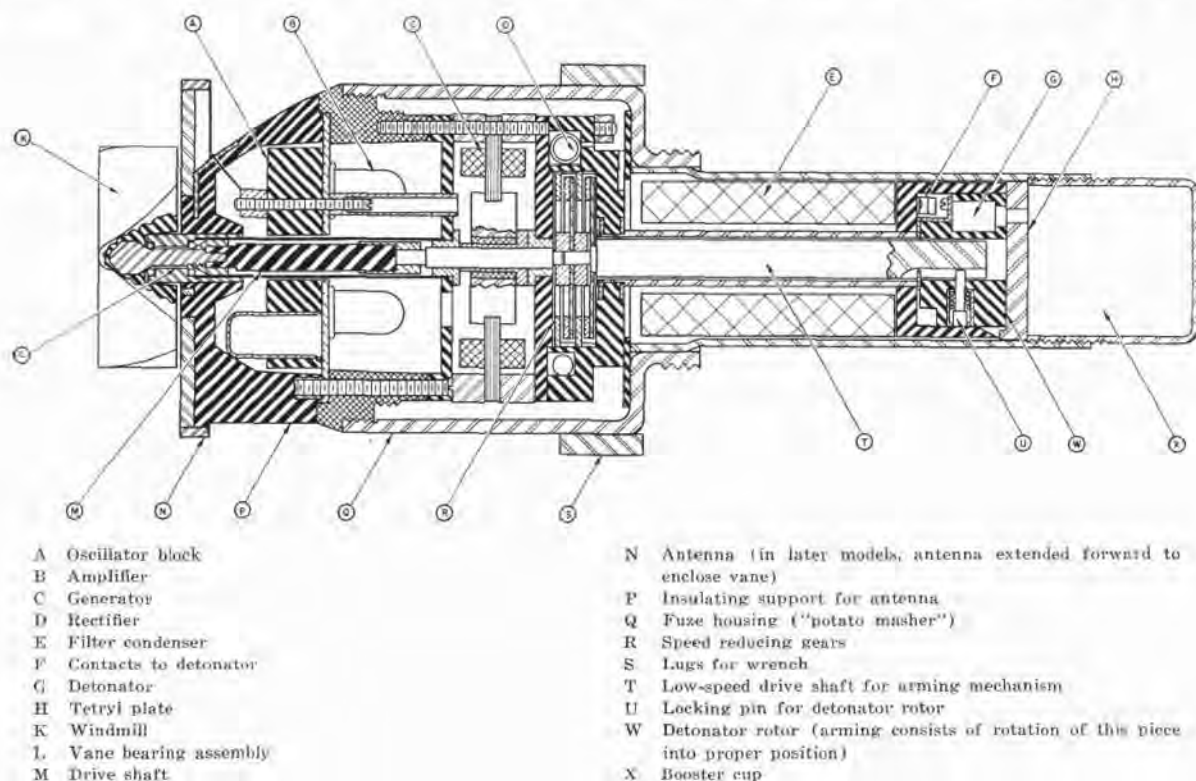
B. Sectionalized drawing of T-50 type bomb fuze. Same general arrangement of parts used for all ring-type bomb fuzes.
